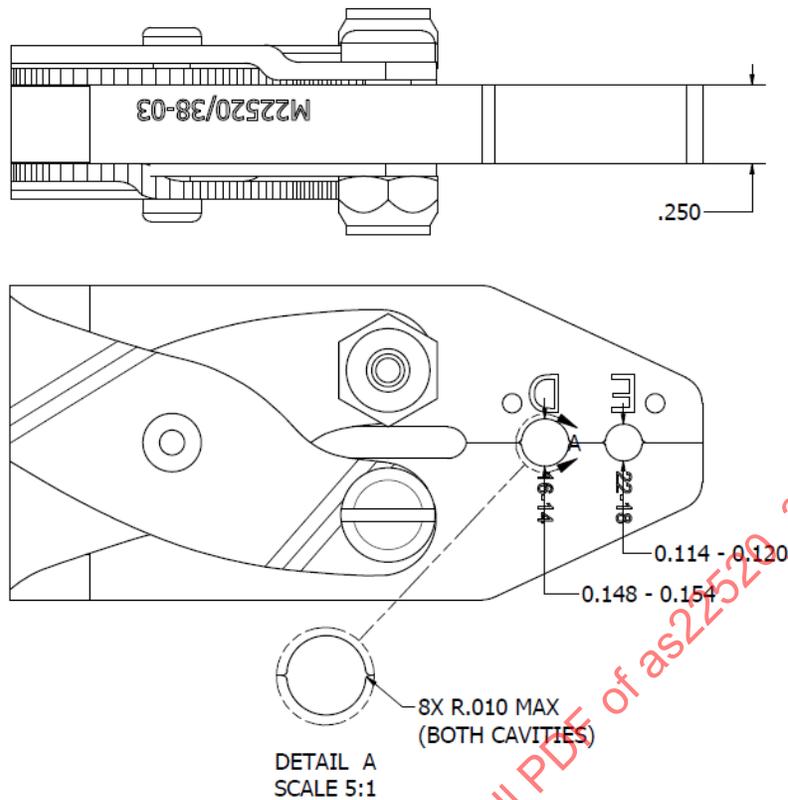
M22520/38-03 TOOL CRIMP CAVITY DIMENSIONS
